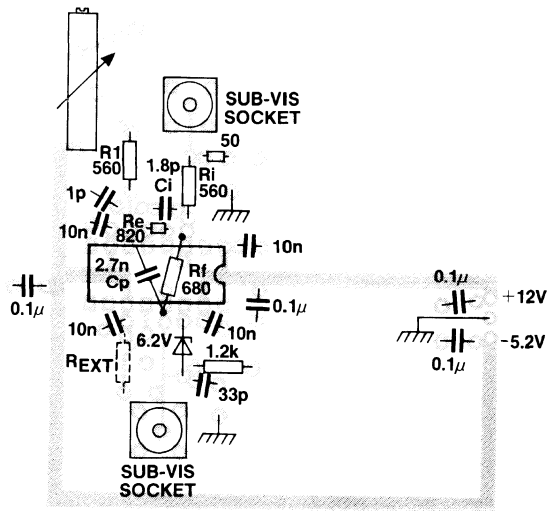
PCB layout for SL9999 demonstration board (Fig.12) viewed from component side and underside
